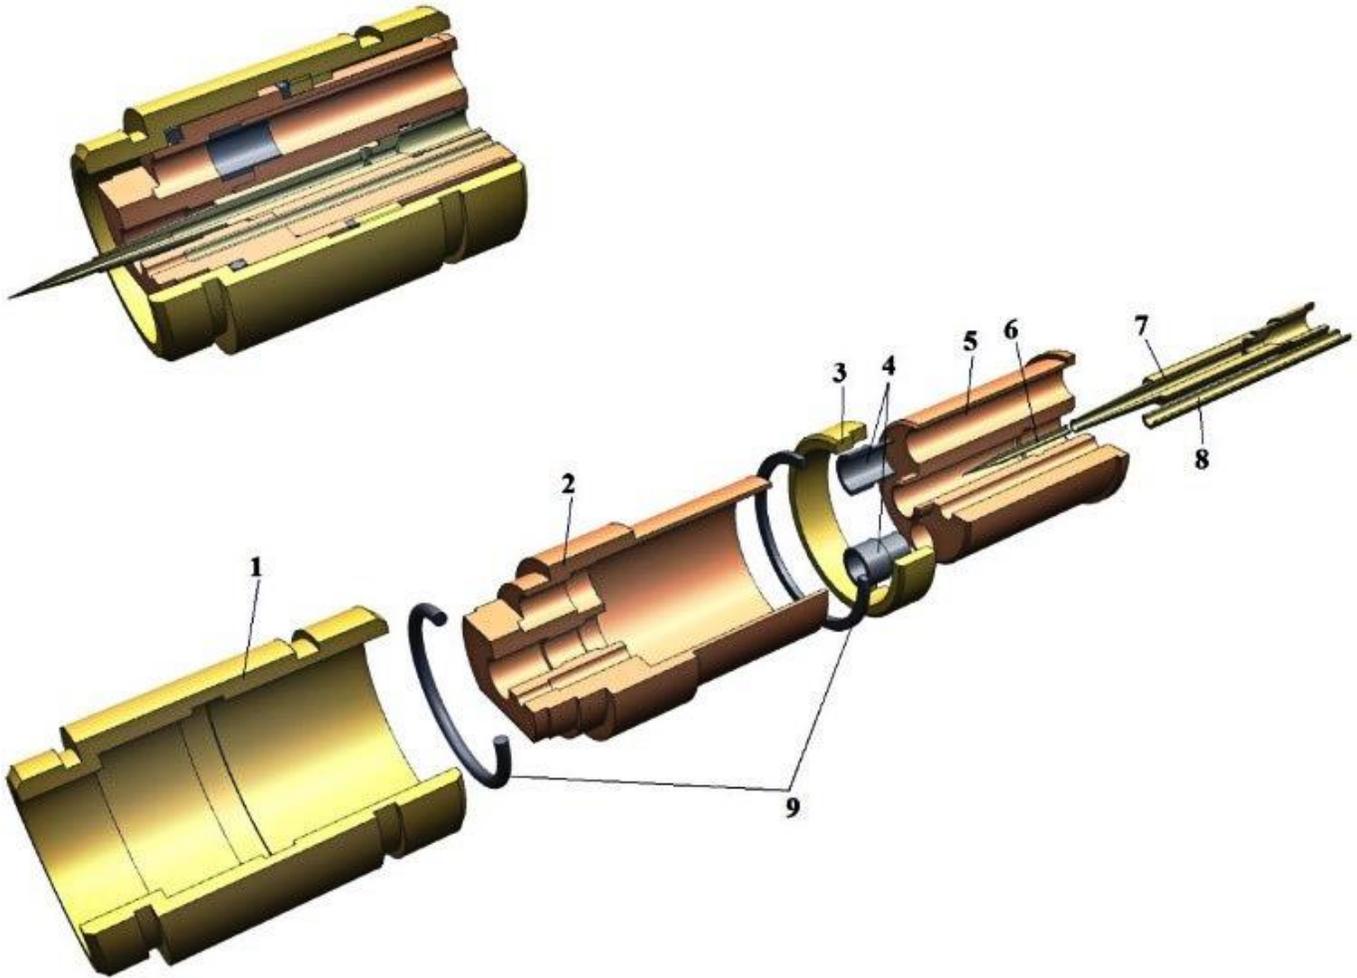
The cathode section: 1 – micro plasma torch body, 2 – cathode insulator, 3 – internal nut, 4 – water sleeve, 5 – cathode body, 6 – tip, 7 – cathode holder, 8 – powder supply tube, 9 – O-rings
